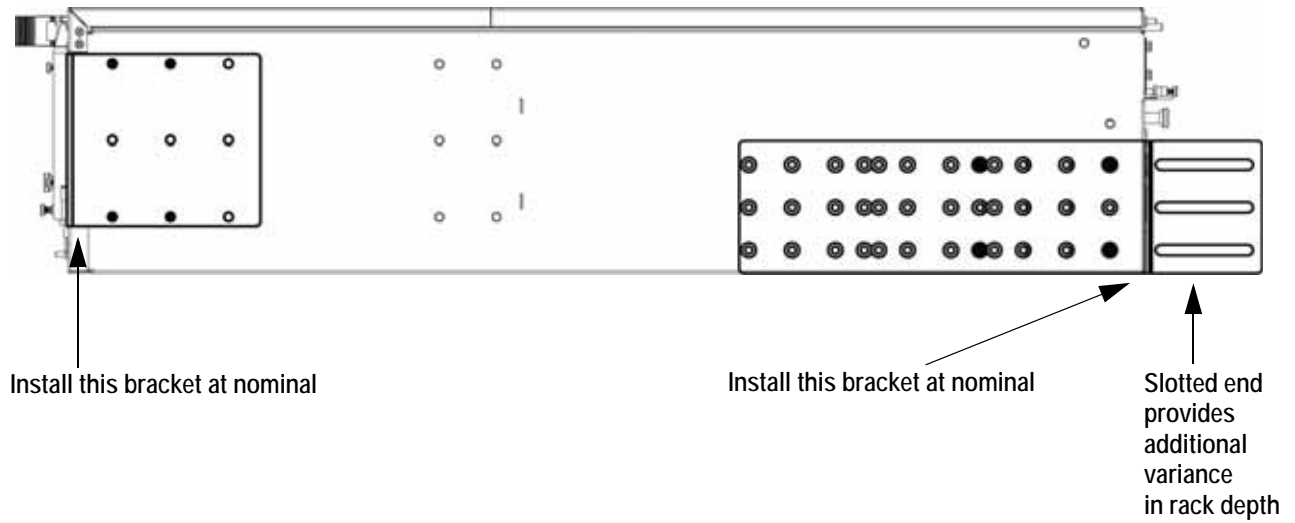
Bracket Mounting for 28.5" to 30" Rack
